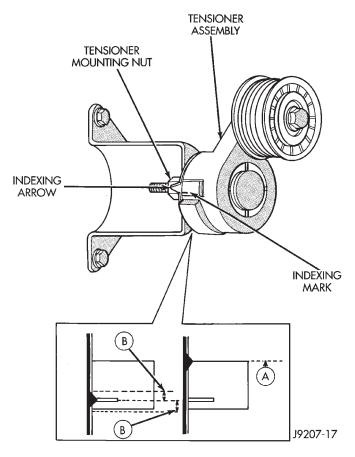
Belt Tensioner/Pulley Assembly—5.2L Engine
